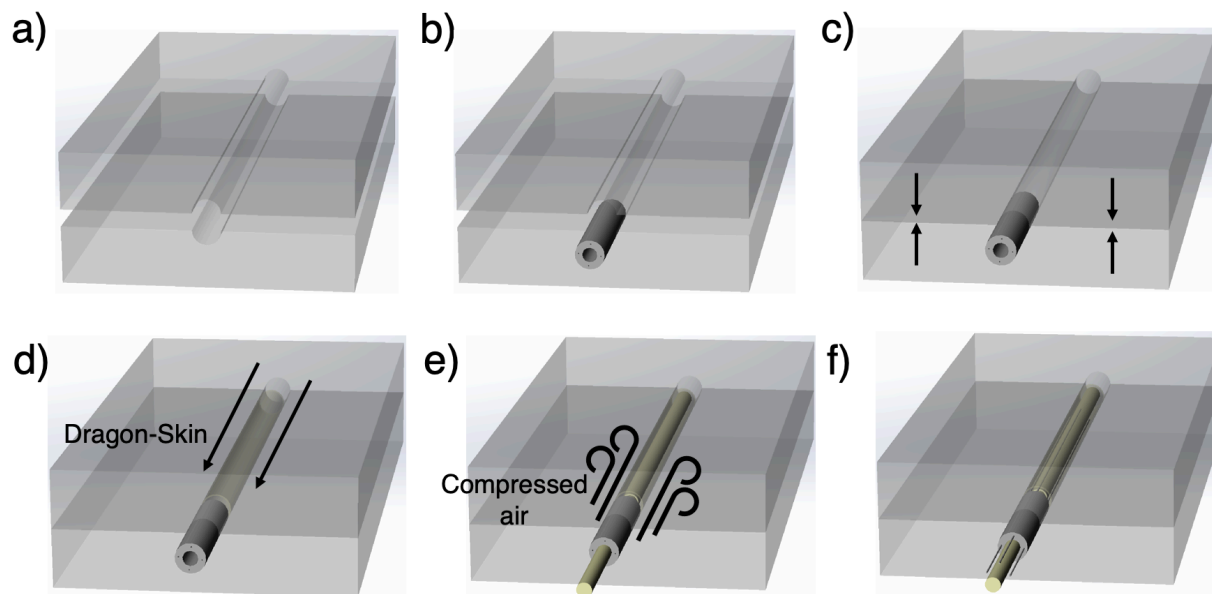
Illustration of the casting process. a) Two molds are placed facing each other, b) A custom extruded glass-capillary tube is placed in the mold and c) hemmed between the two molds. d) Dragon-Skin[®] 10 SLOW (Smooth On, Inc) was pumped into the mold and compressed air (2 psi) was pumped through the custom extruded glass capillary tube. e) (Silane was deposited via CVD on the assembly, b) Smooth-Cast[®] 327 was poured over the assembly and allowed to cure for 24 hours. c) Upon curing de-bonded to obtain the mold e).
